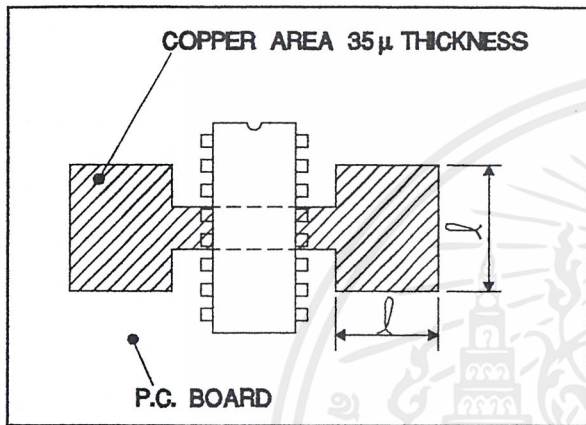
Example of P.C. Board Copper Area which is used as Heatsink
